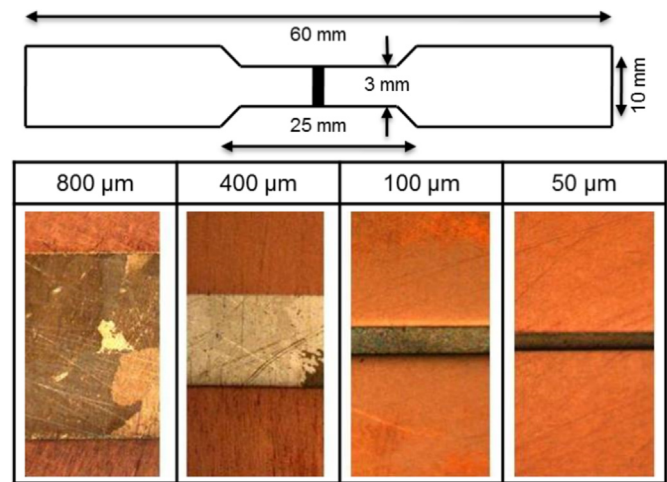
Schematic picture of the specimen geometry (Cu/Sn3.5Ag0.75Cu/Cu) and illustration of the fabricated solder gap size.
